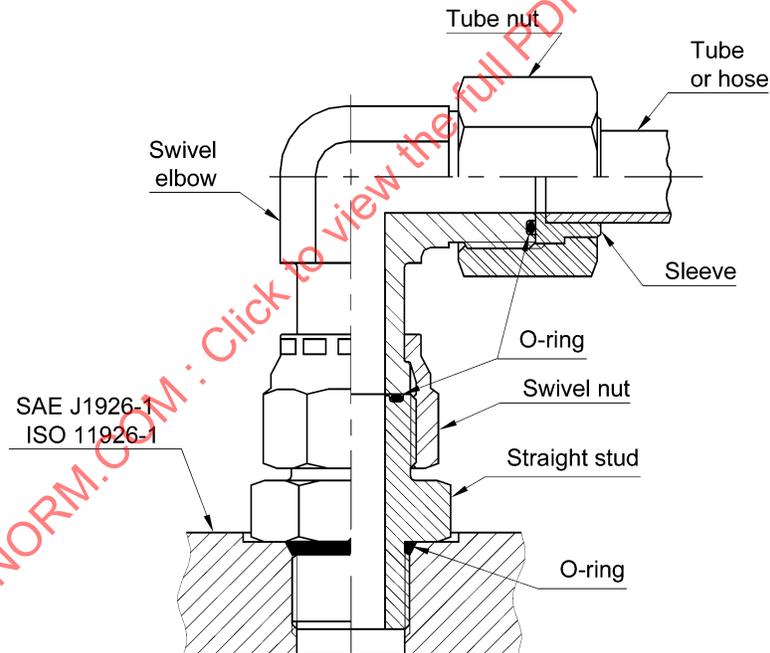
TYPICAL CONNECTION STRAIGHT STUD WITH 90 DEGREE SWIVEL ELBOW
